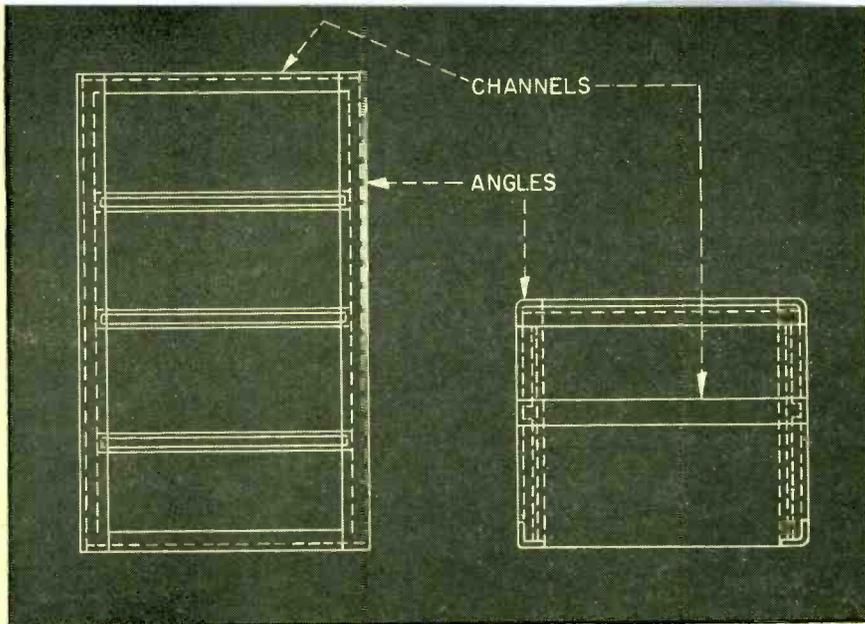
Plan and front elevation of a Christmas-tree frame. This provides a rigid structure of channels to which panels can be fastened. Chassis are mounted in horizontal drawers
